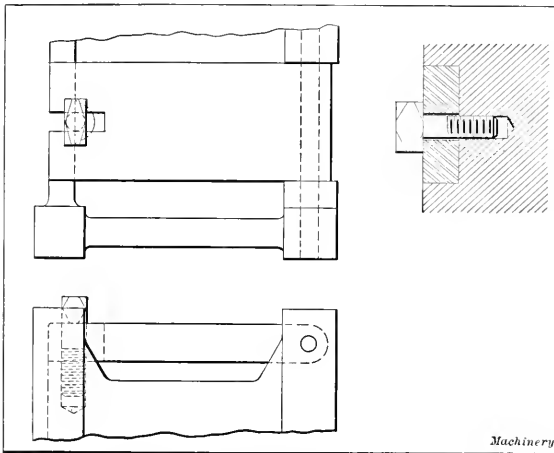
Jig Cover locked by Quarter Turn Screw Buckle
